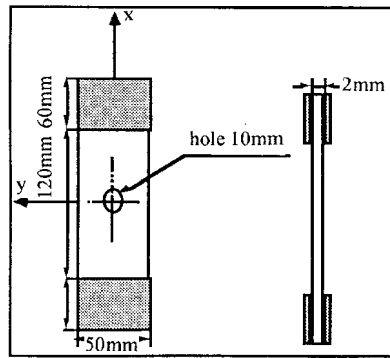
Specimen geometry for tensile loading on notched specimen.
